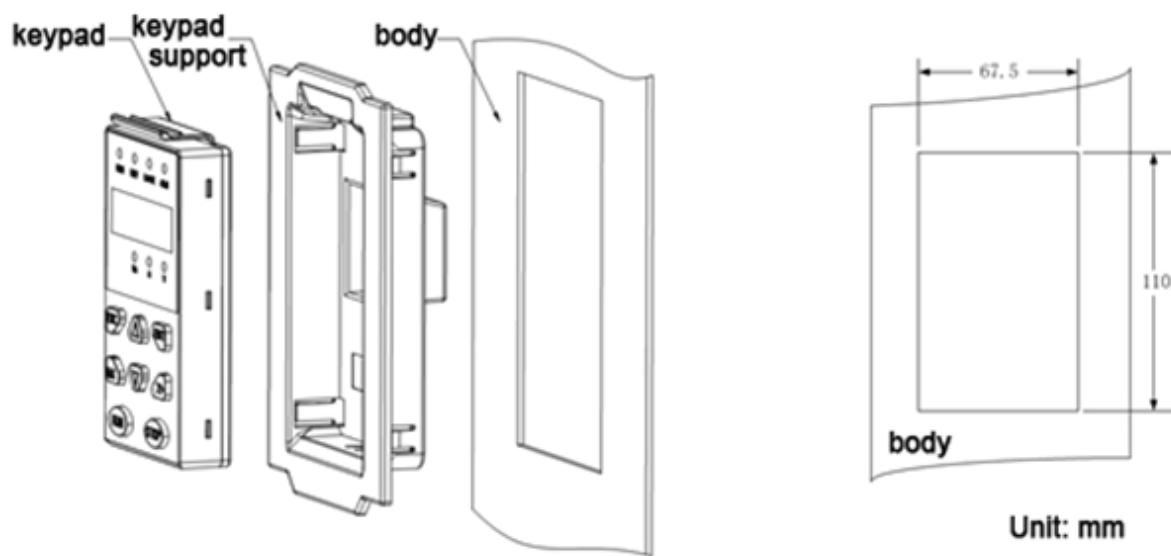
Keypad support installation diagram and control cabinet processing dimensions
